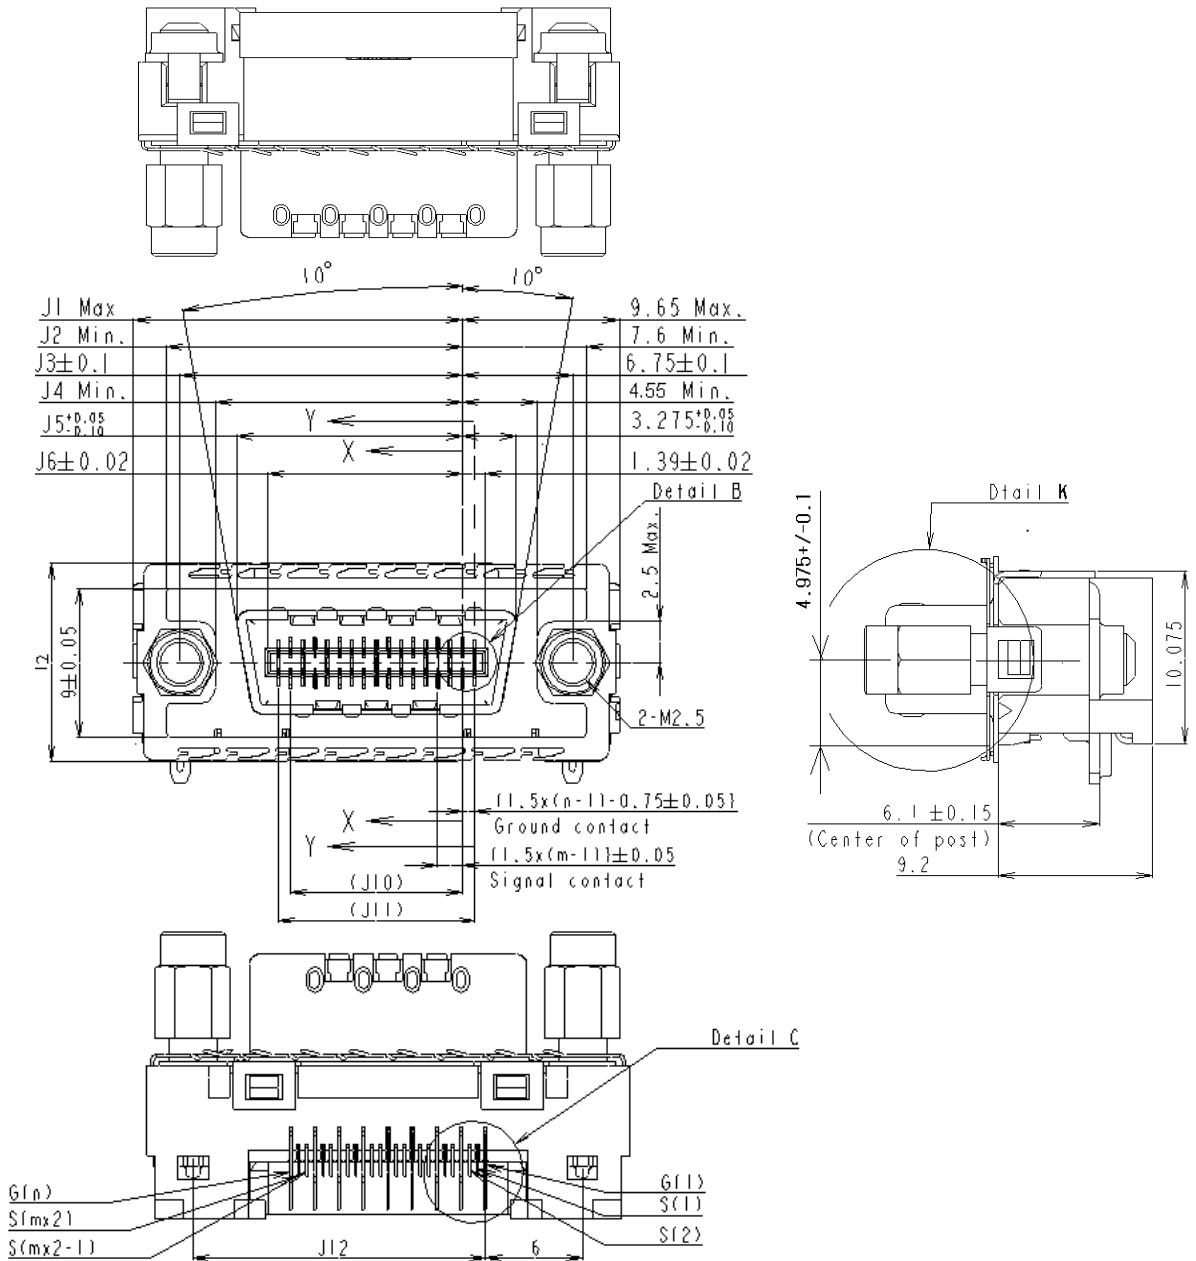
Latch Receptacle Panel Cutout / Assembly Dimensions
